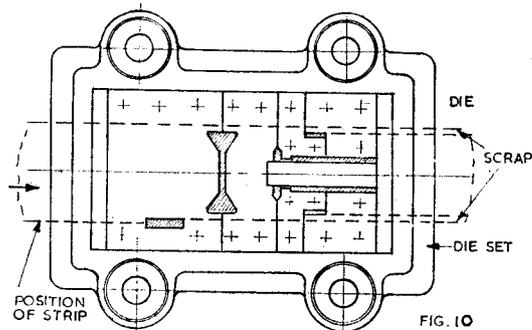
Plan view of die with stripper removed showing the die construction, apertures shaded
